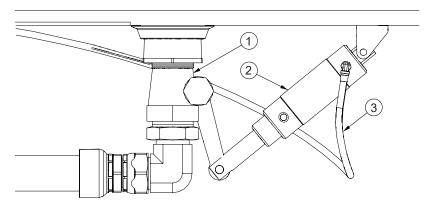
Fuel Tank Underside - Emergency Valve Assembly
